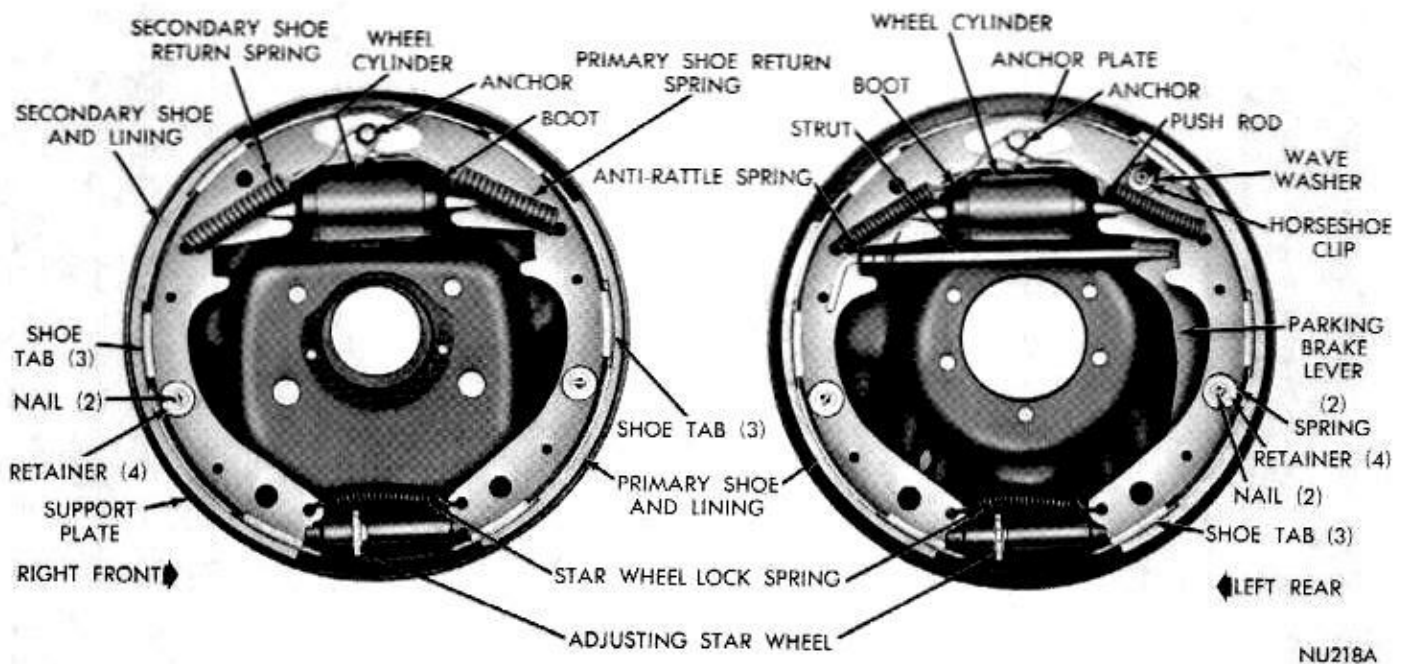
Eleven Inch Brake Assembly (Taxi)
